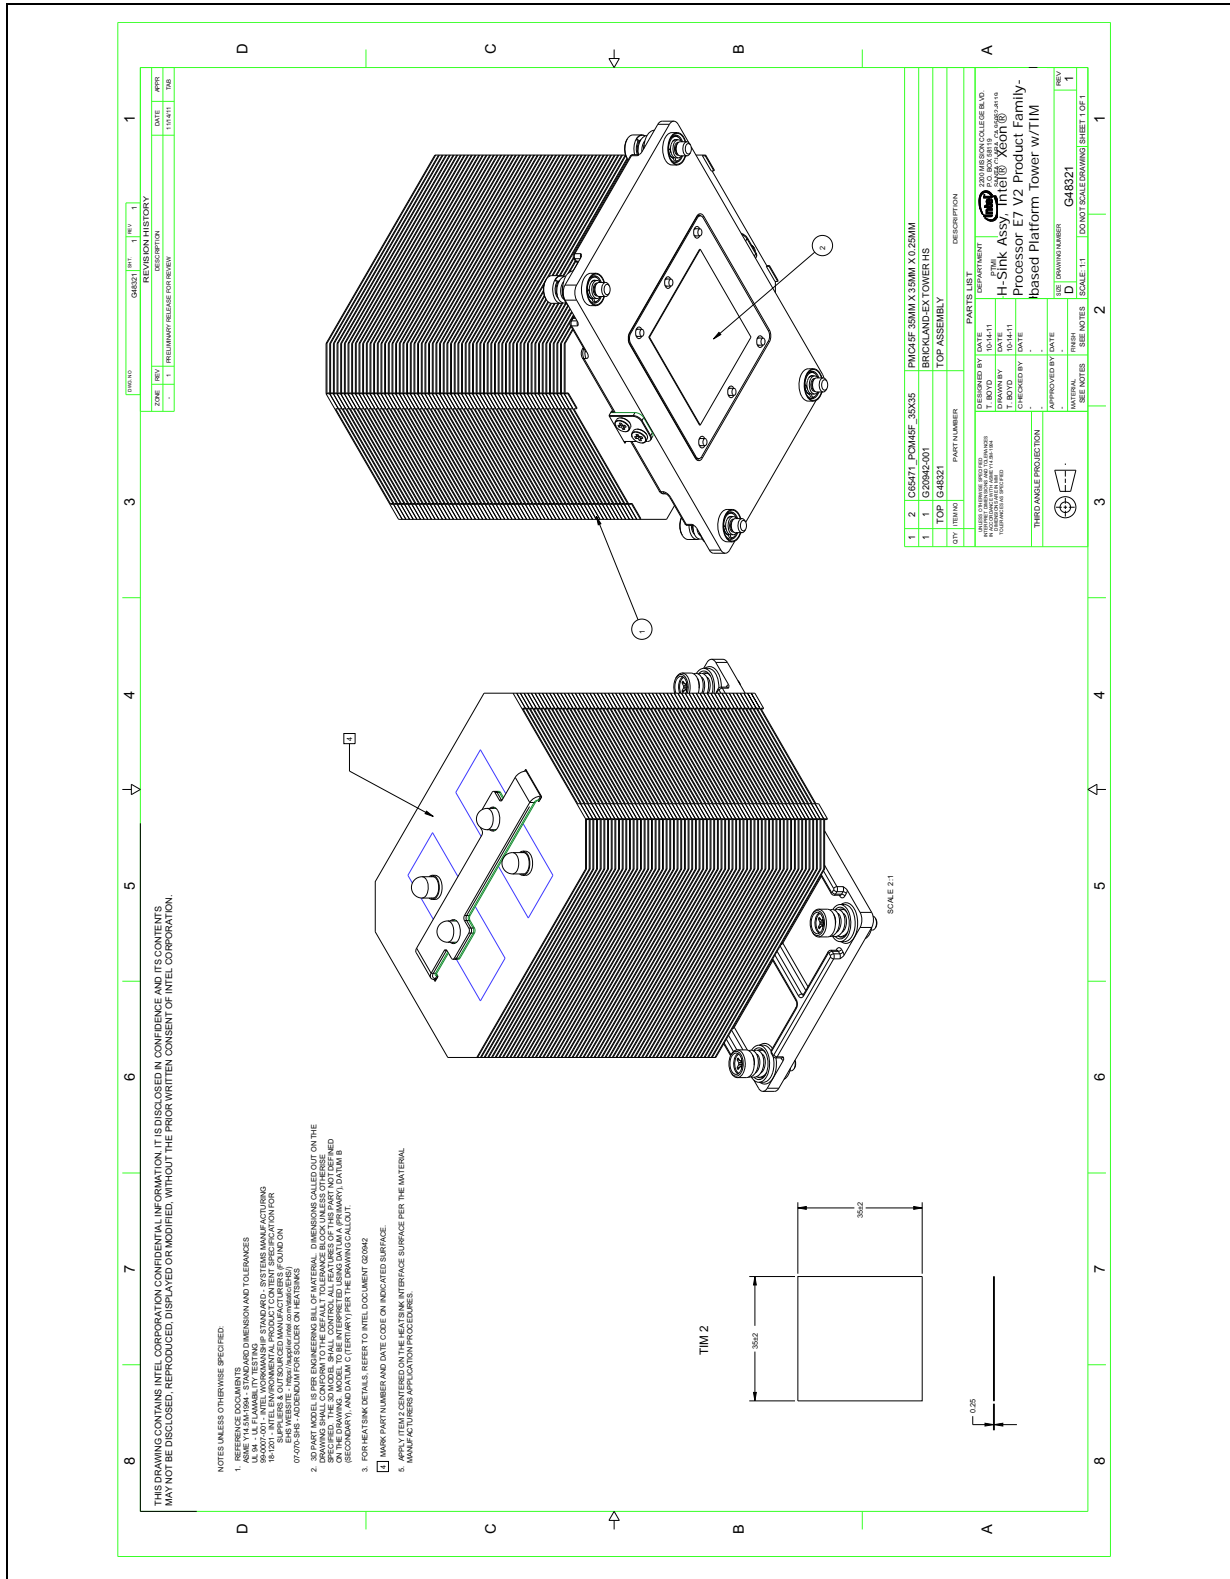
Processor 4U Heatsink Assembly Drawing - G20942 Rev E
